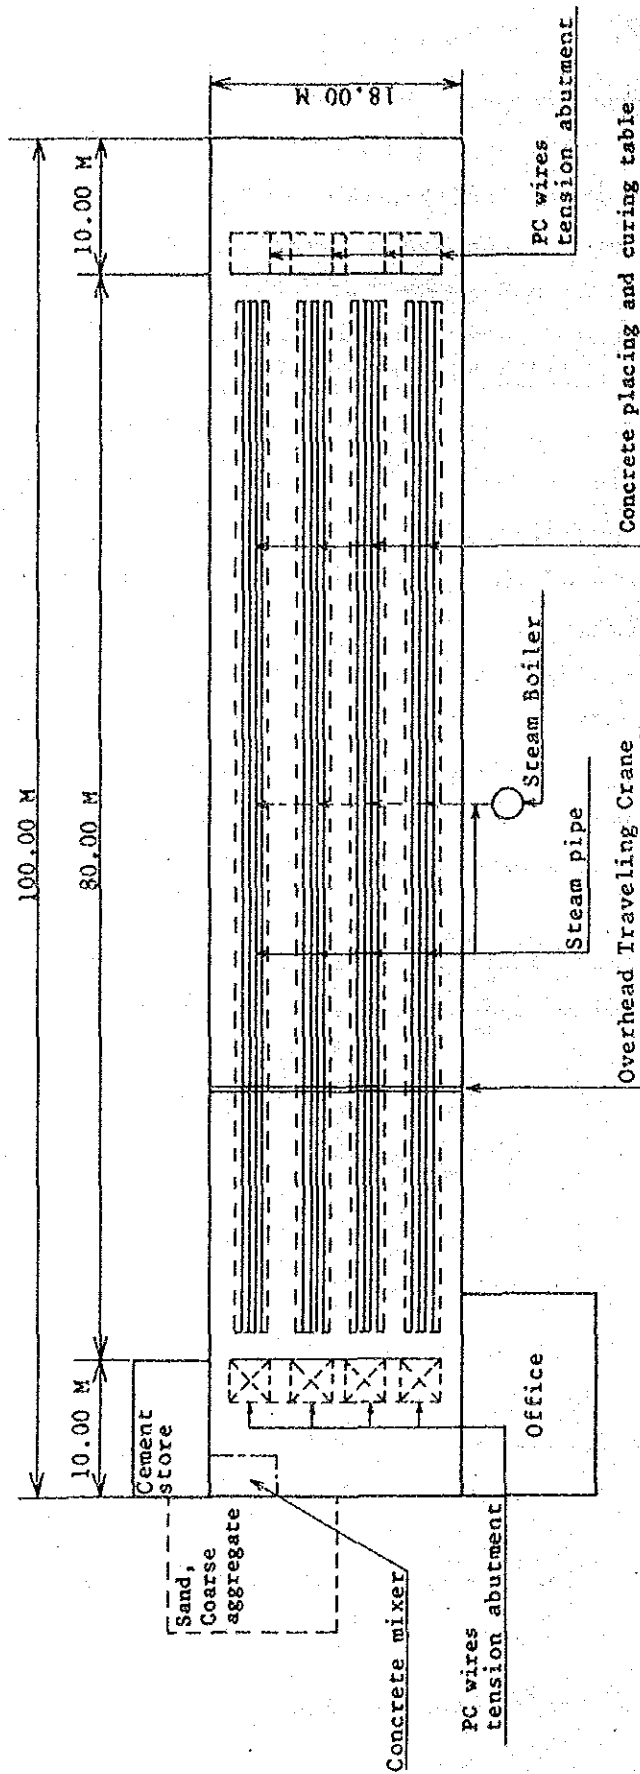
PC Sleeper Factory (Pretension) Layout
